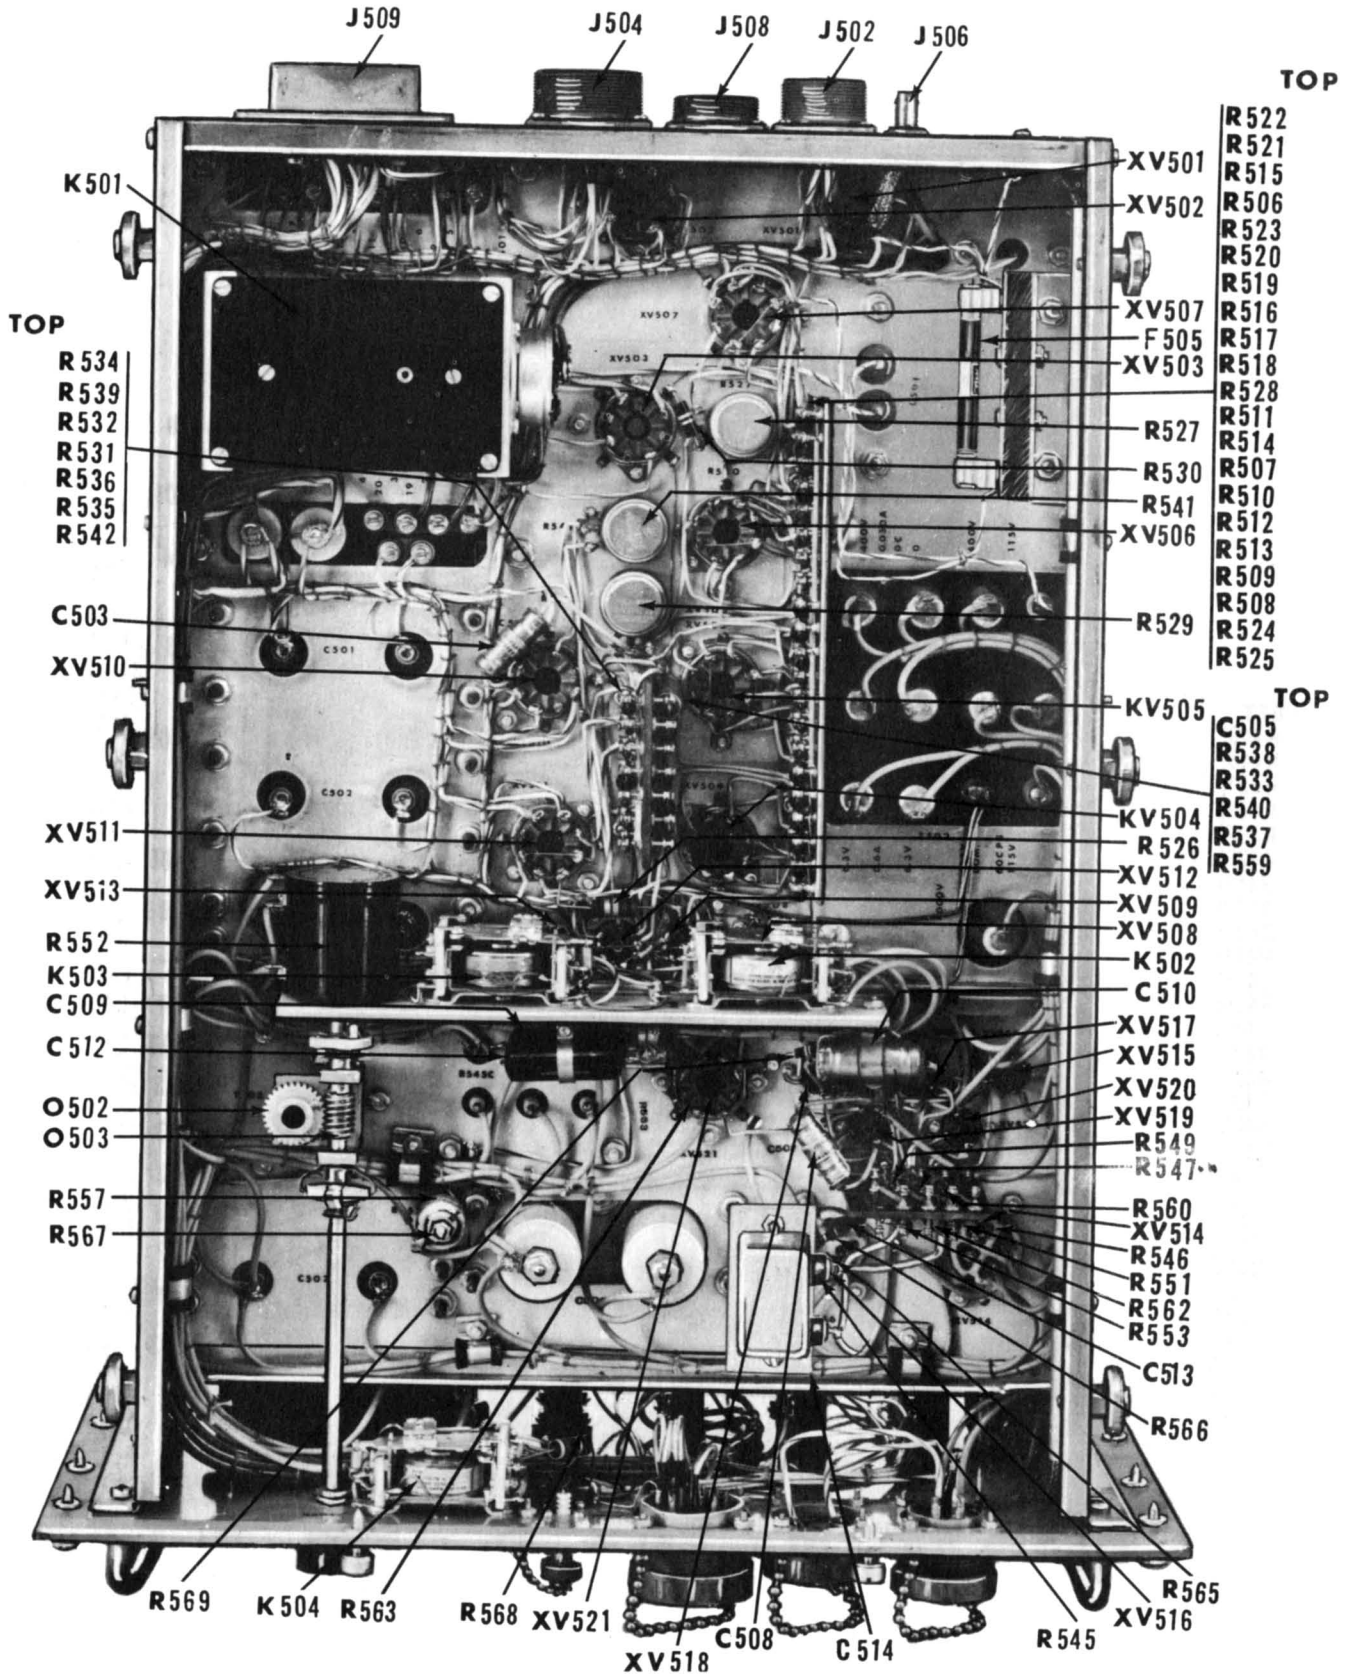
Power Supply PP-948/UDR-9 Component Location, Bottom Side
